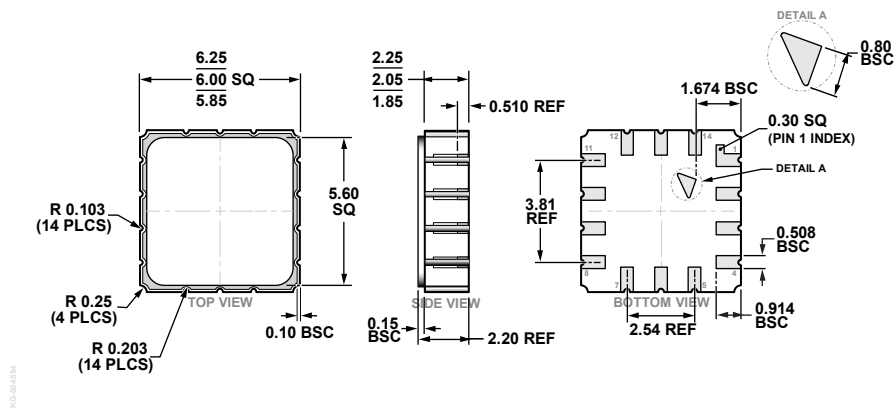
14-Terminal Ceramic Leadless Chip Carrier [LCC]
